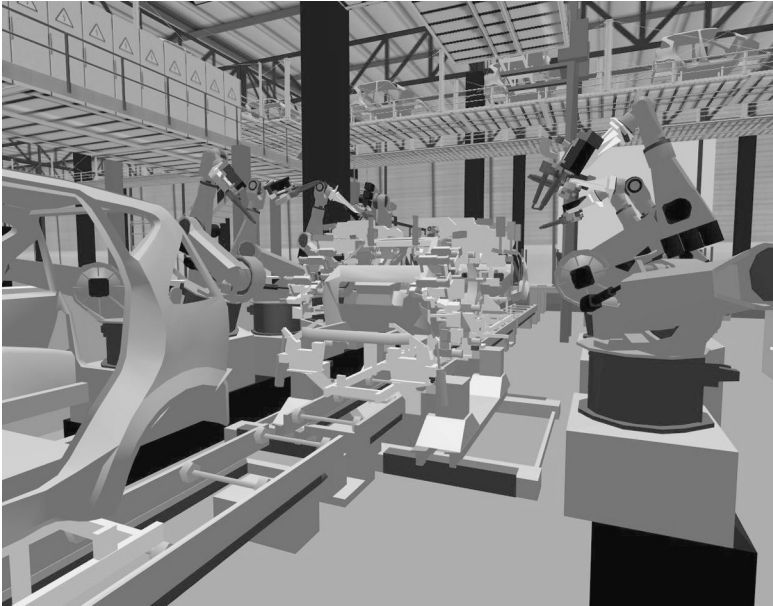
Robot Welding Cell of a Production System. (Source: HLRS and Fraunhofer IPA)
